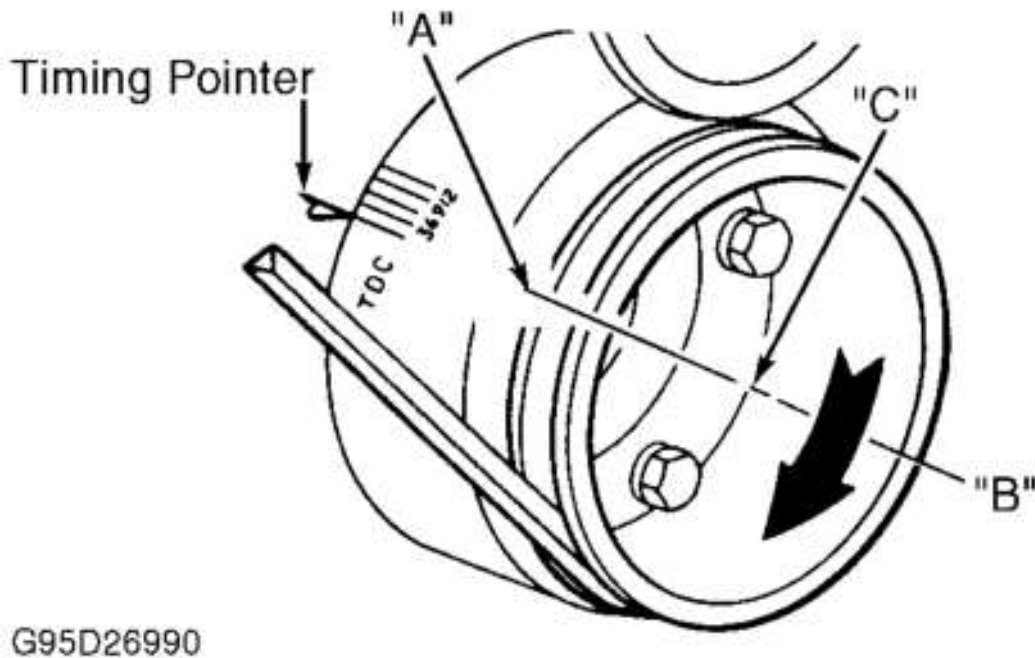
Identifying Crankshaft Positions For Valve Adjustment
